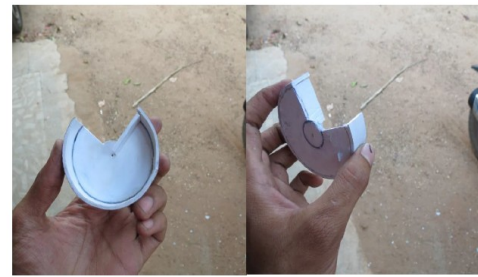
Photographs depicting the making of the bottom slotted disc
